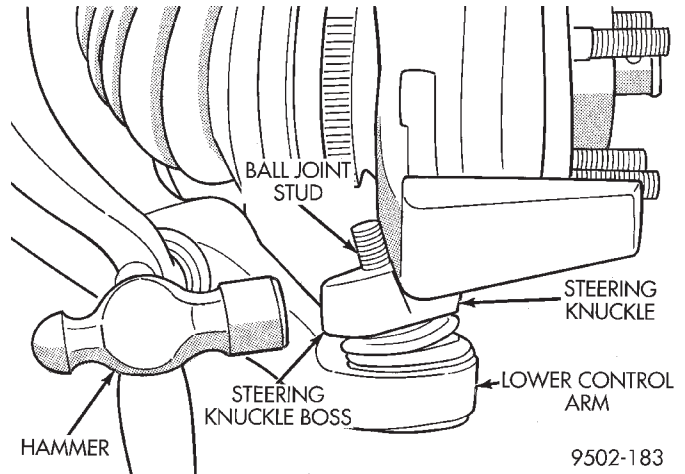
Separating Ball Joint Stud from Steering Knuckle
